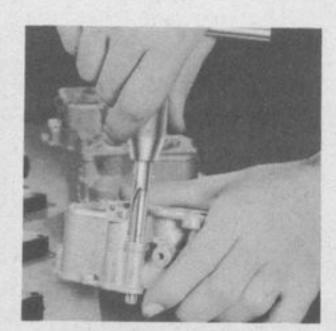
Cleaning Hole for Accelerating Pump Shaft
